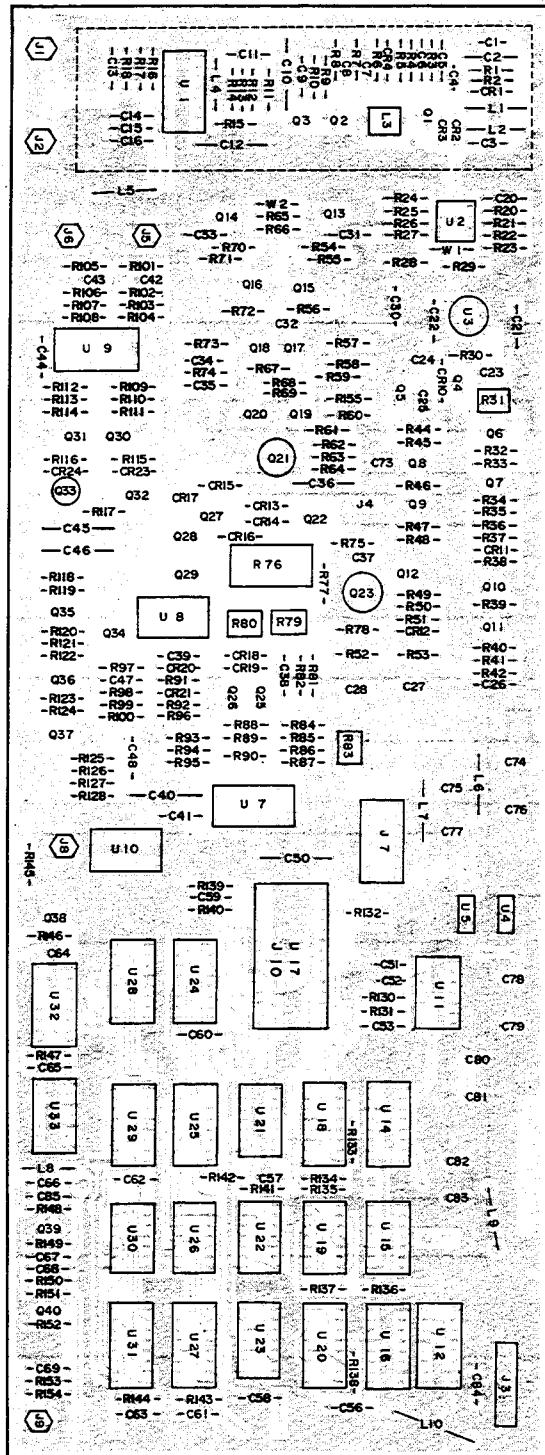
A4 Fractional N Loop Board Assembly Component Locations.
